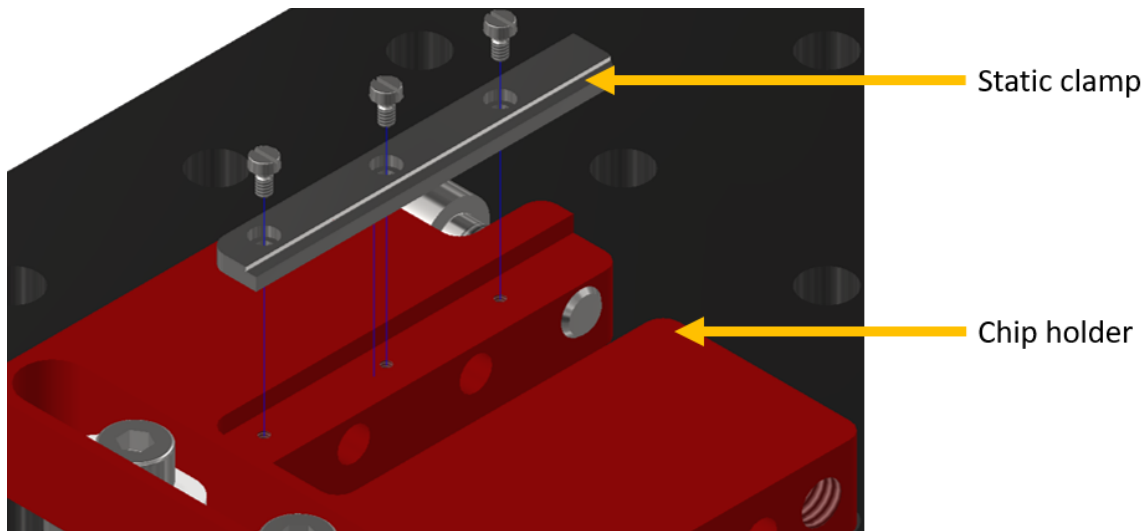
A clamp is screwed on the chip holder, details about its geometry are given in fig.G.8.
